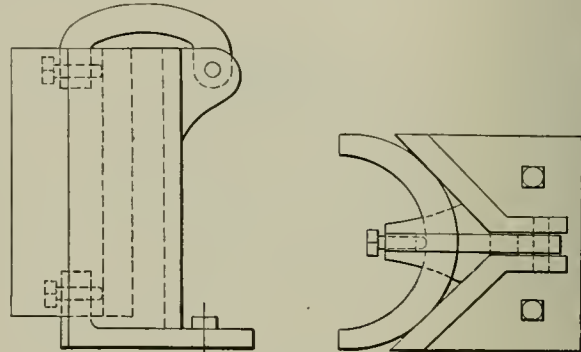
Jig for Holding Driving Box Brasses When Machining the Ends on a Slotter
